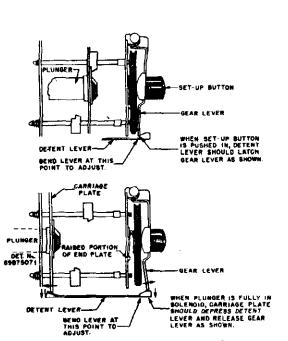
GEAR LEVER LATCH ADJUSTMENT
